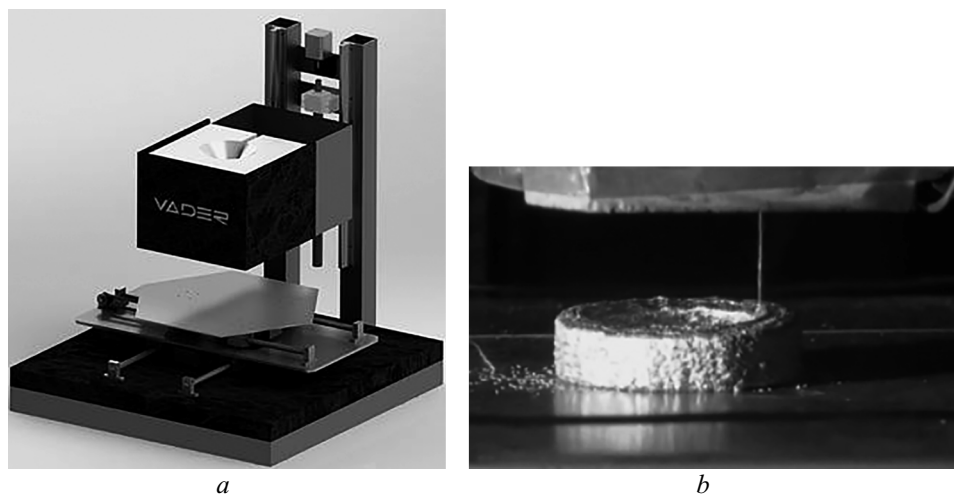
Vader 3D printer: *a*) experimental model [13], *b*) liquid metal printing process [14]
